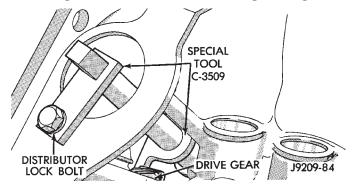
Camshaft Holding Tool C-3509 (Installed Position)
